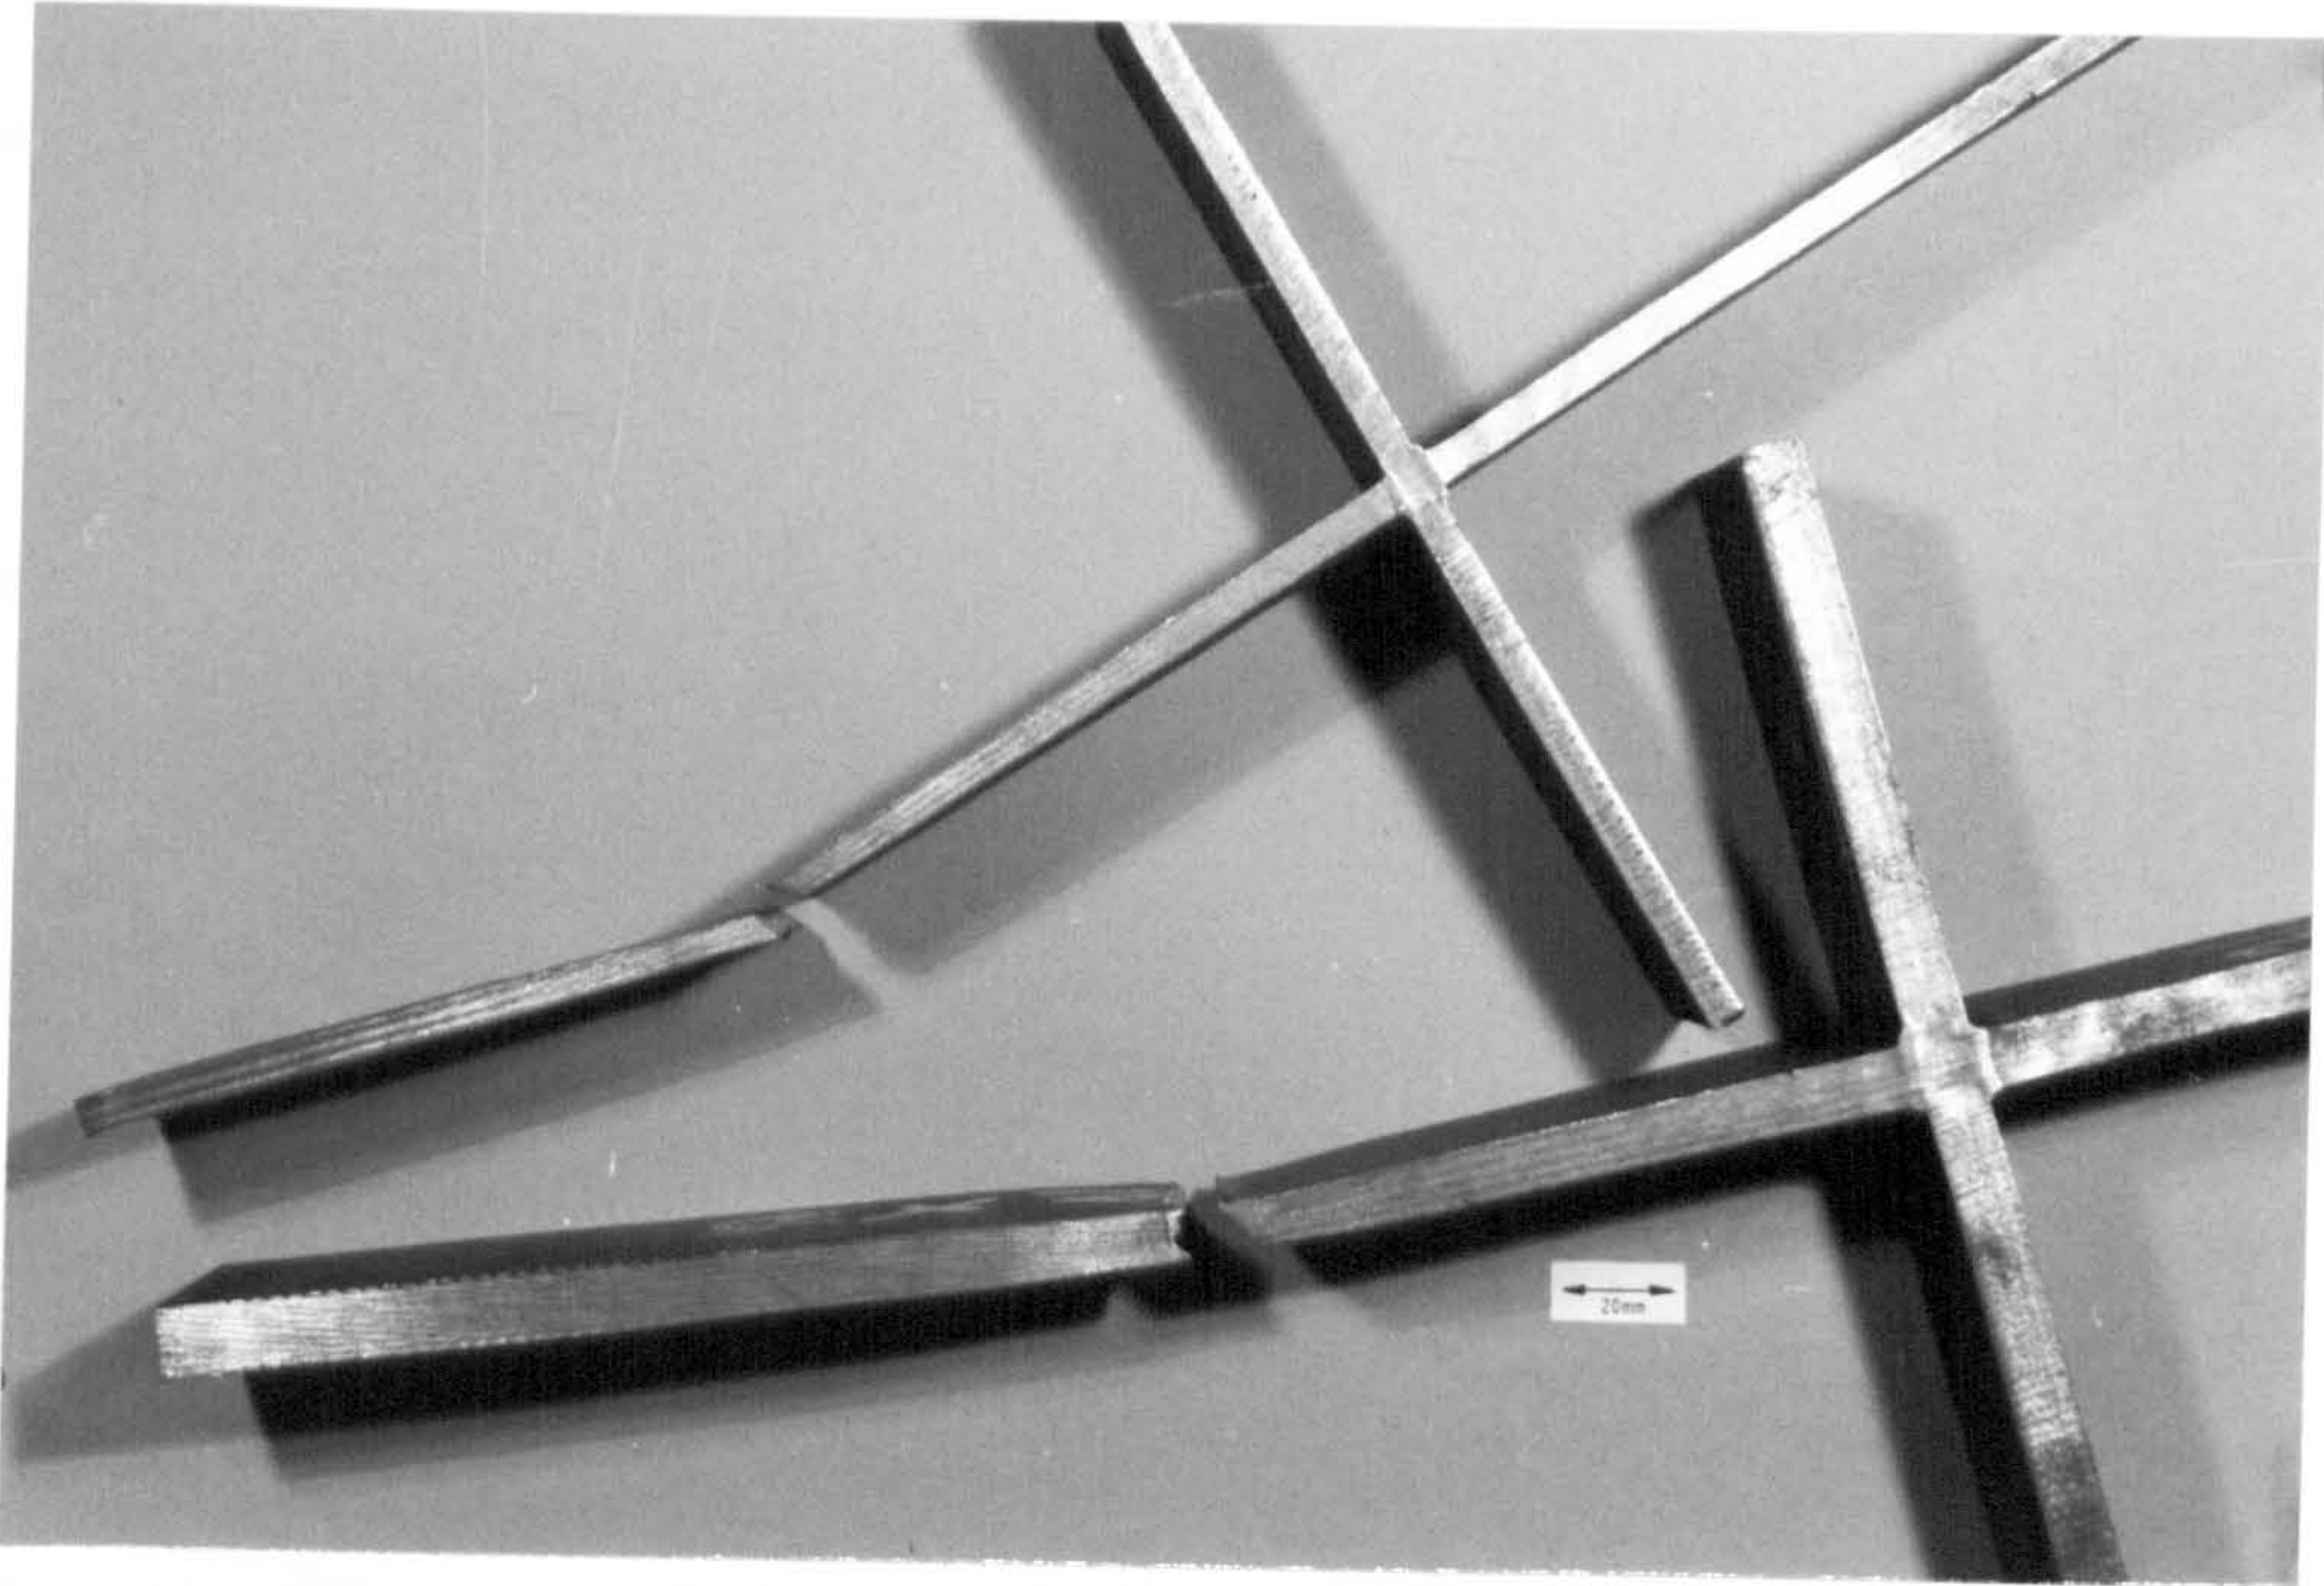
Laser skid welded cruciform samples failed in the parent plate during tensile testing
